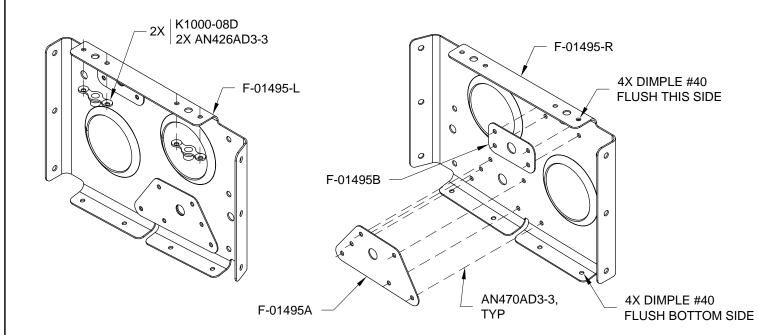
RIVET RIB DOUBLERS & NUTPLATES
